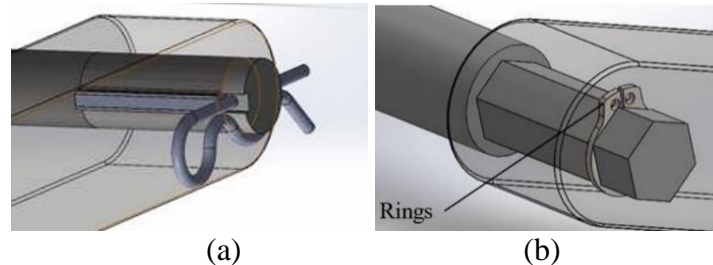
Lever arm connection by; (a) keyway, (b) minimizing the clearance in the joint
